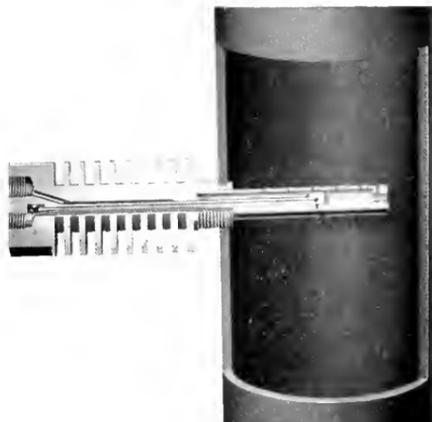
Sectional View of Nozzle Plug Installed in Pipe
